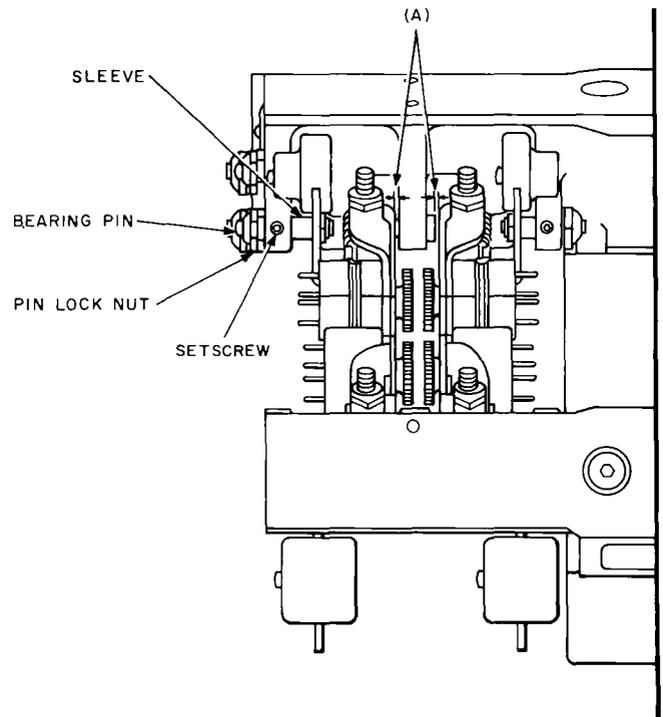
Method of Positioning Record and Erase Head Assemblies on KS-12068 L3 and L3 Converted per X-4174
